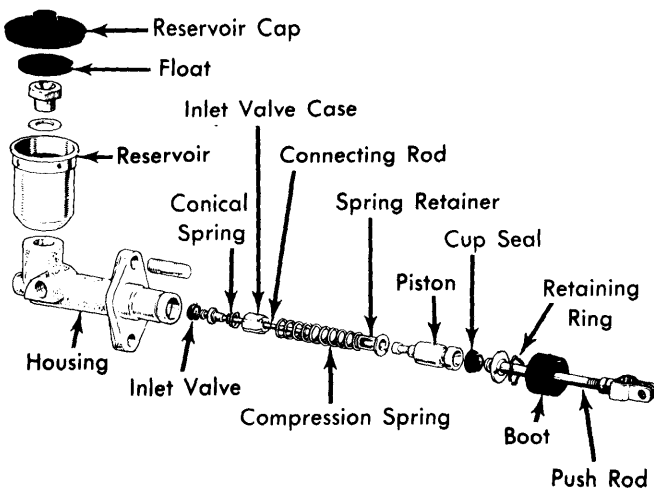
Exploded View of Clutch Master Cylinder (Corona, Celica, Corolla Shown – Others Similar)
